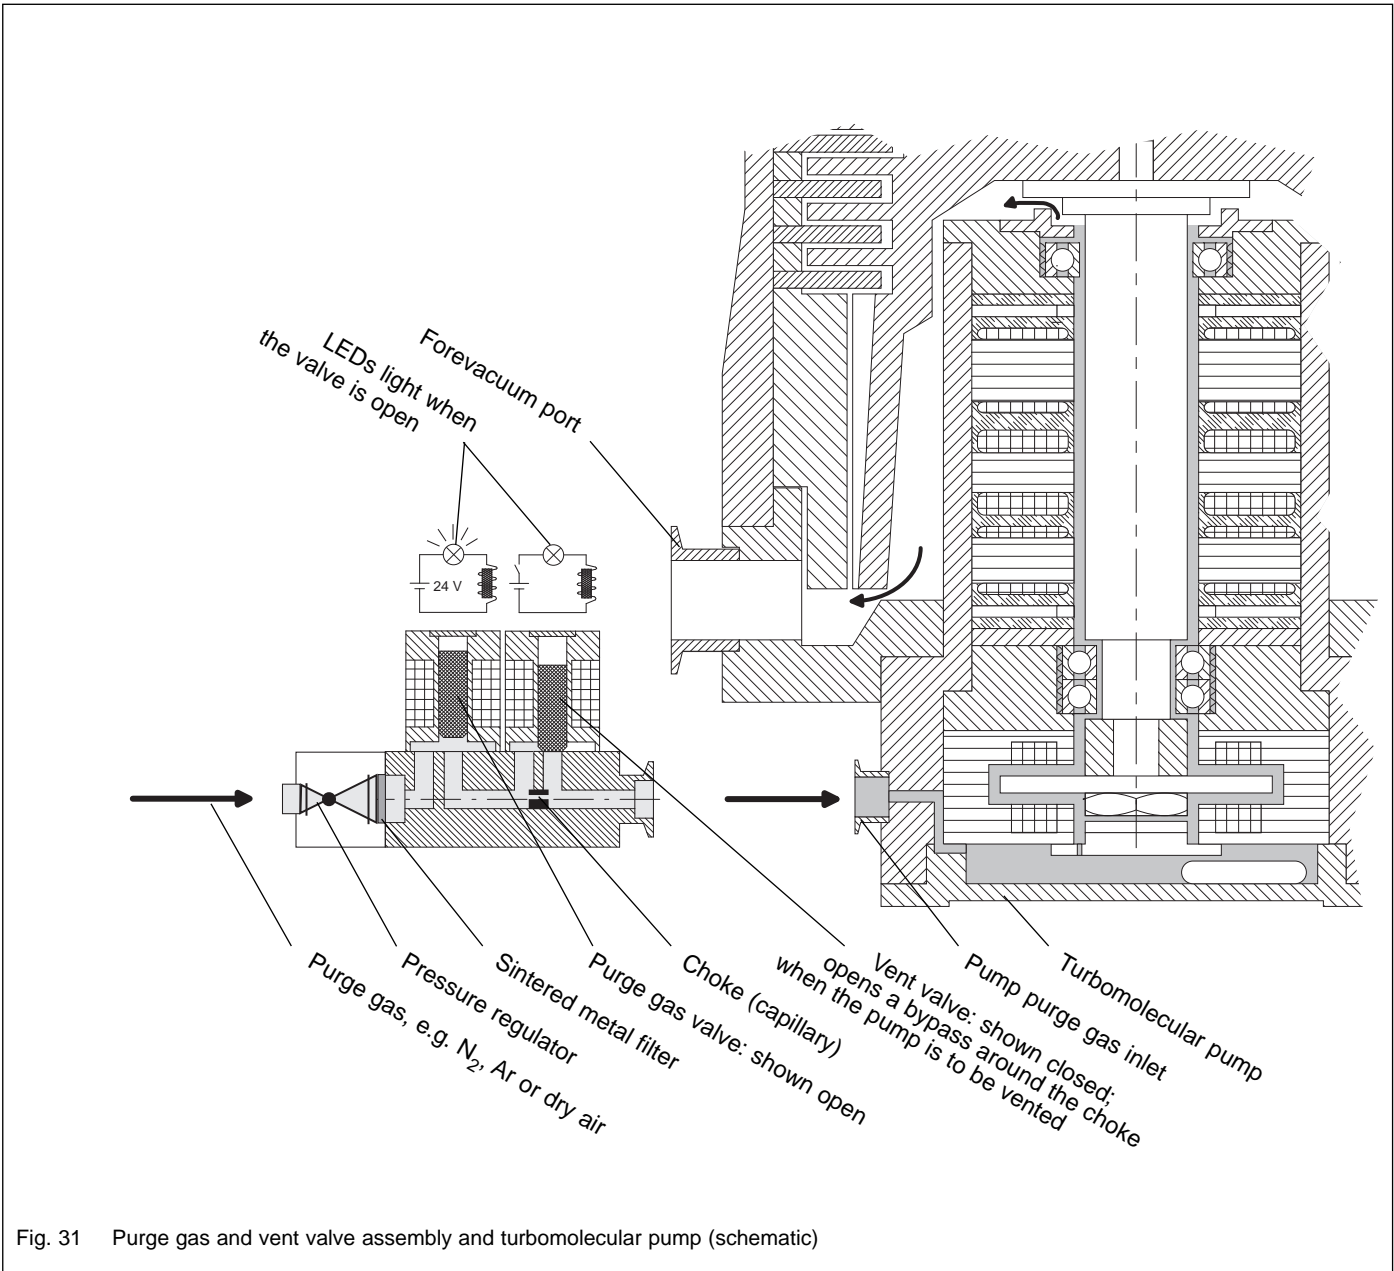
Purge gas and vent valve assembly and turbomolecular pump (schematic)
